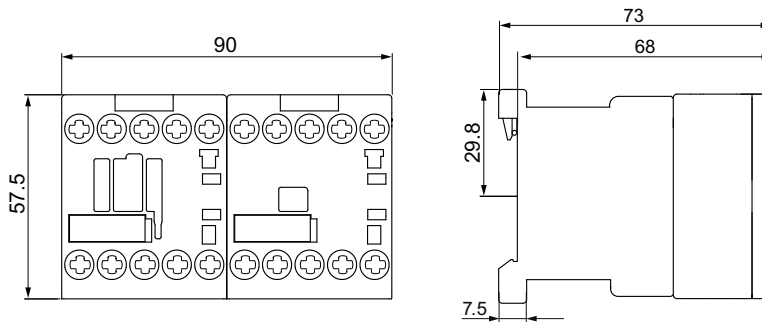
Latched 4-pole contactor relay 3RH24..-1 (screw-type connection system)
